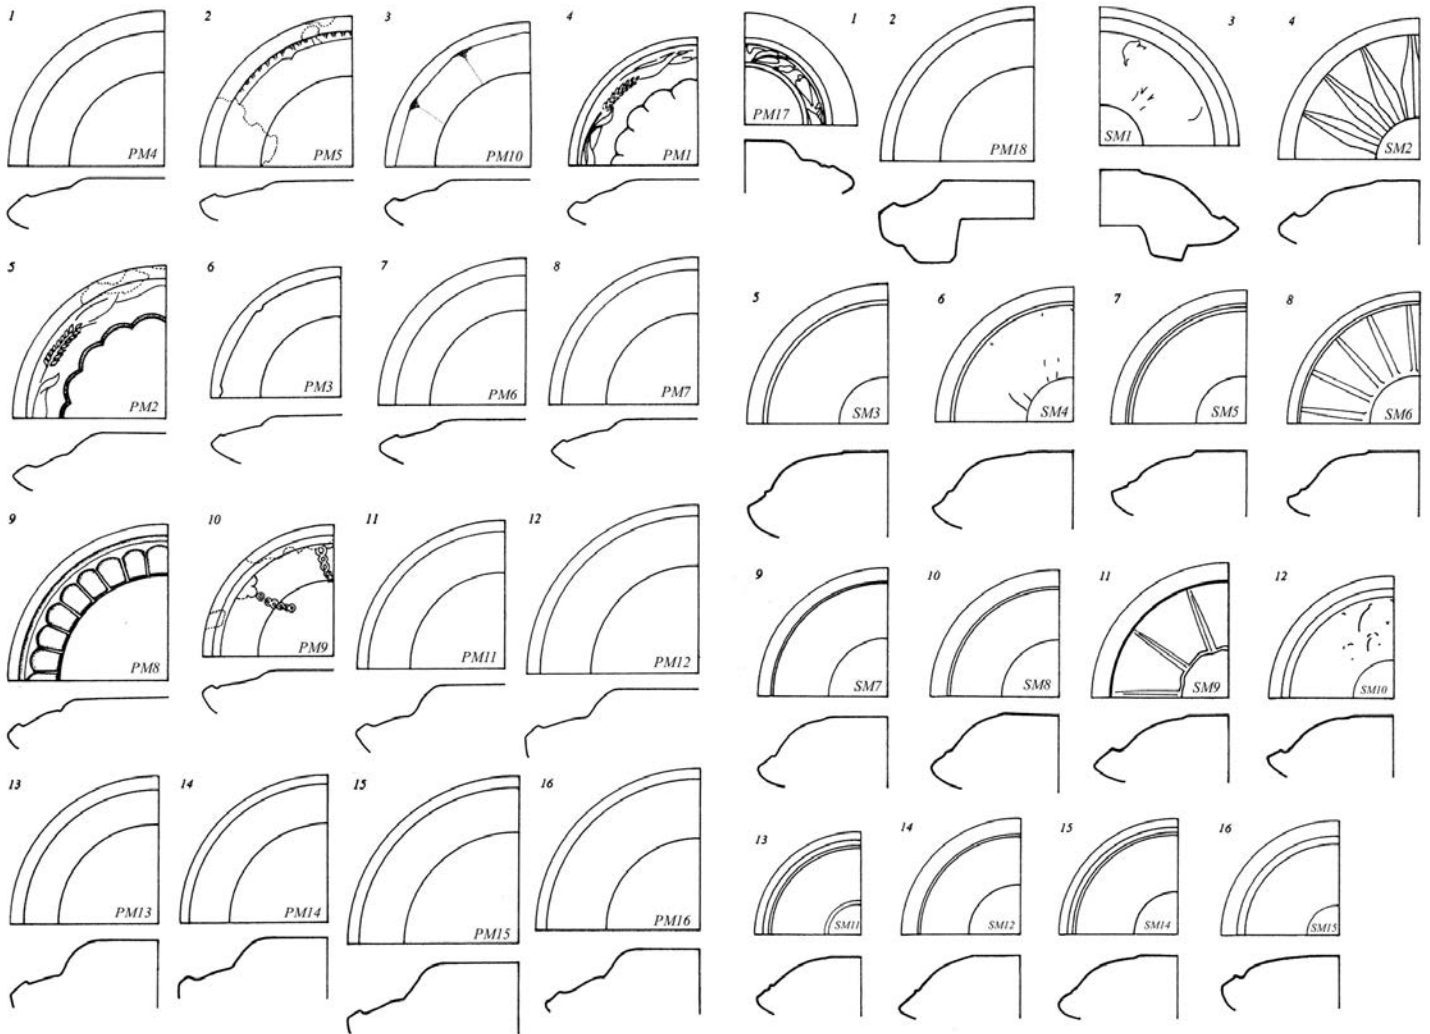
Plate moulds PM1-PM18 and saucer moulds SM1-SM15.
